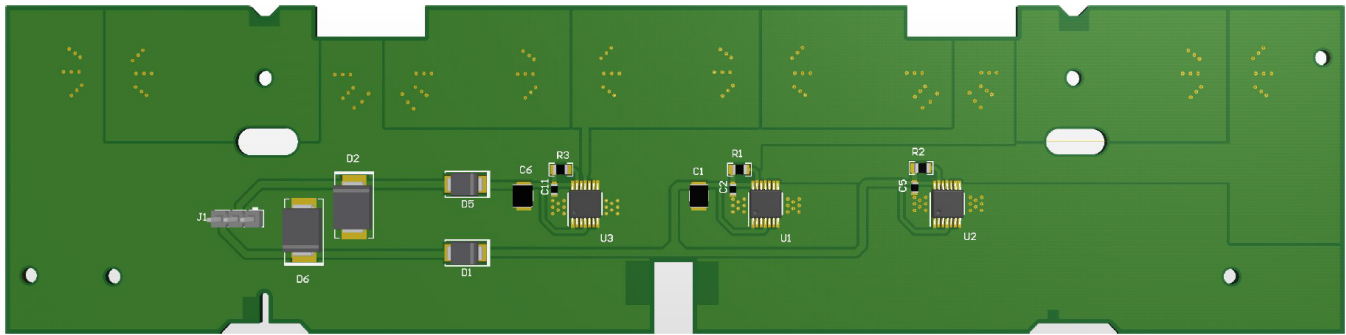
3-D Render of TIDA-01521 PCB (Bottom View)
